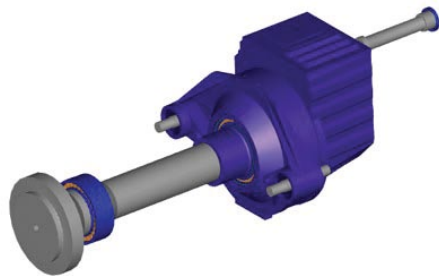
The fully detailed RomaxDesigner software gearbox and drivetrain model.
